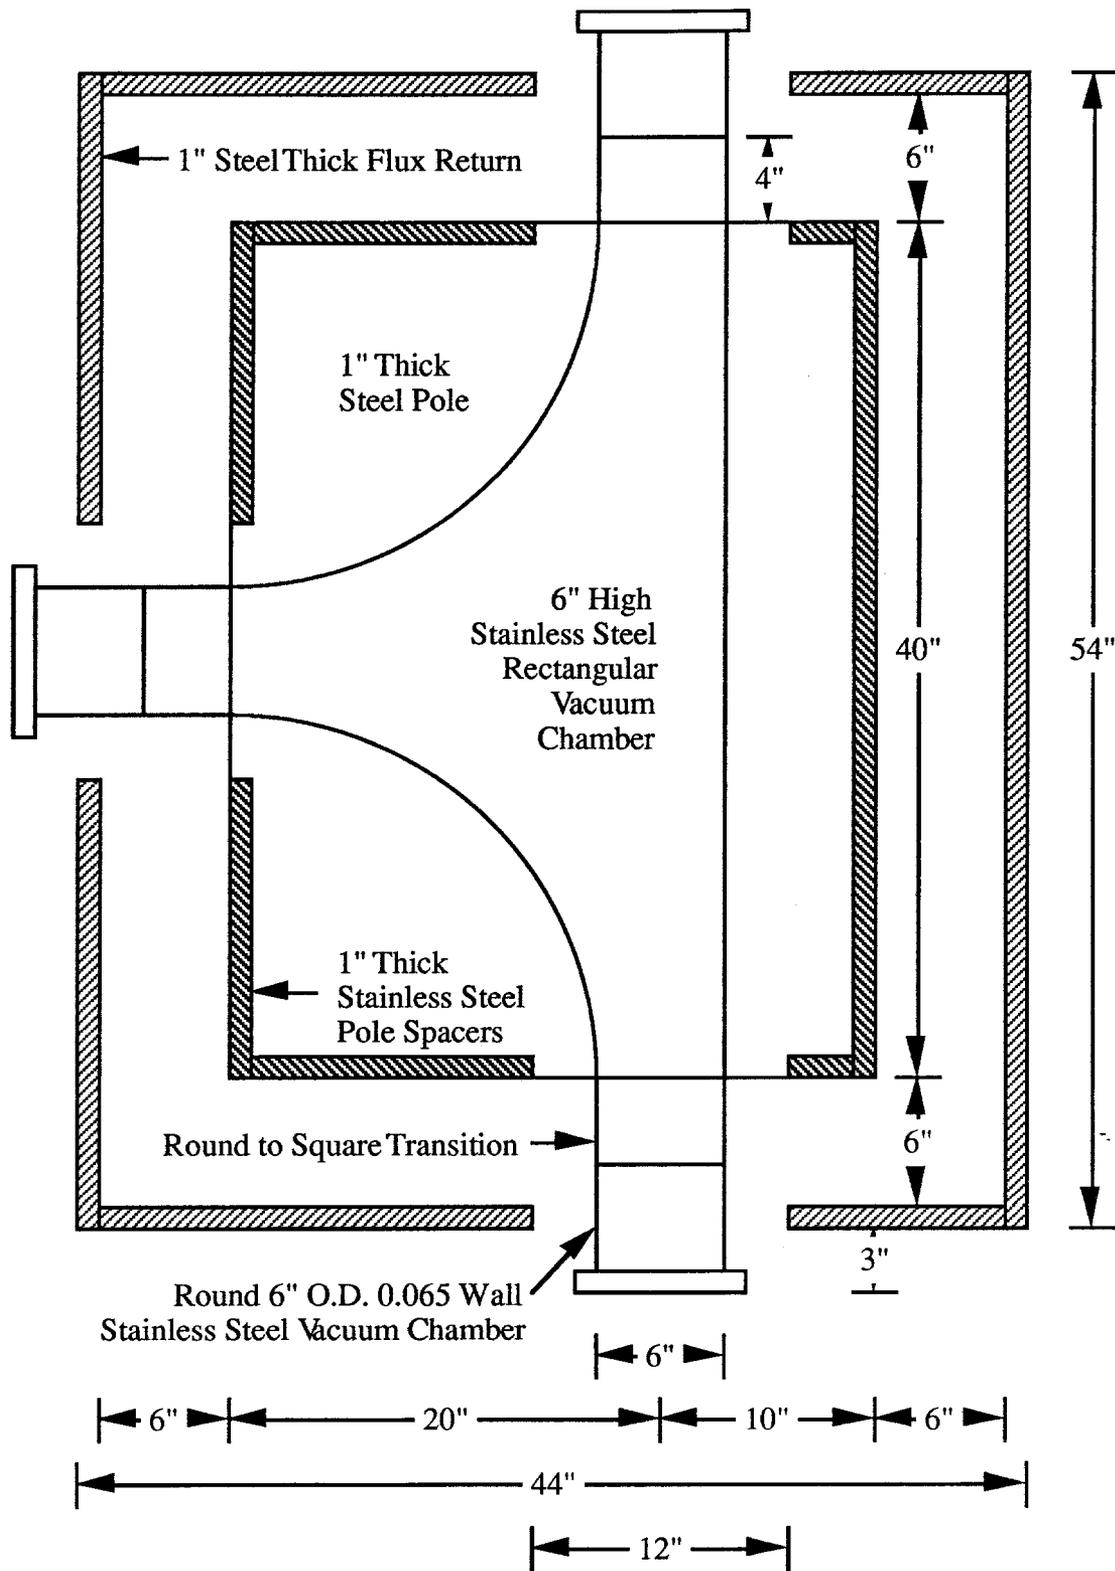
Top view of the magnet and the stainless steel vacuum chamber.
